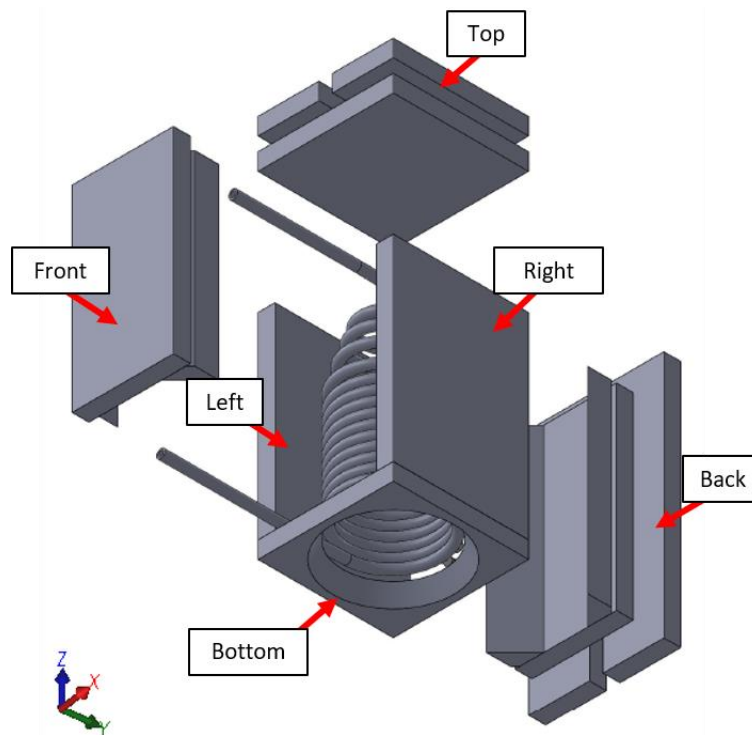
Exploded view of the receiver cavity depicting the sections of insulation
